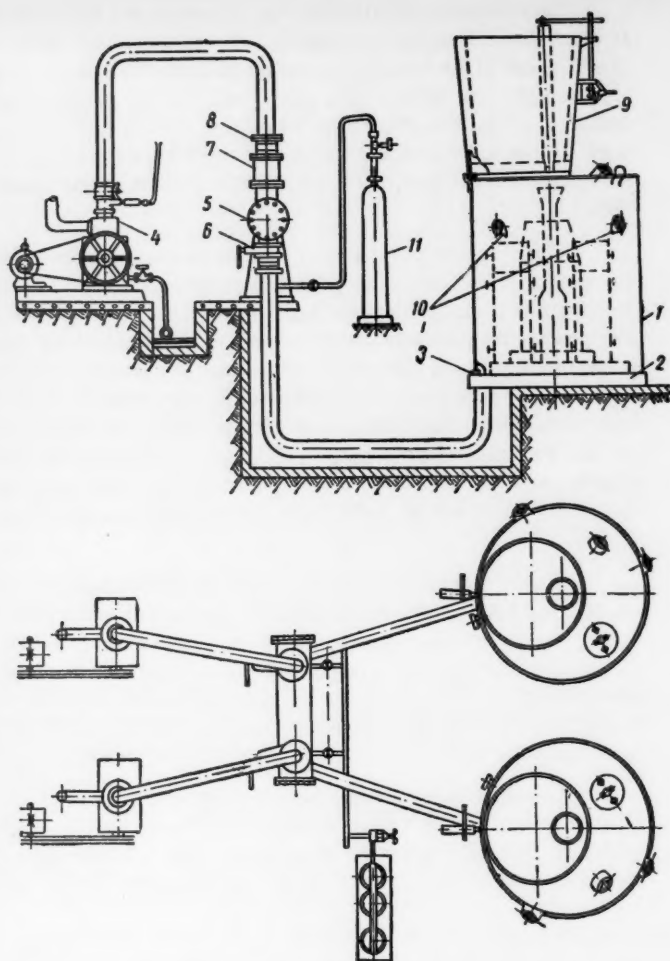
Diagram of an installation for casting steel and alloys in vacuum and in inert-gas atmosphere. 1) Hood; 2) support plate; 3) rubber gasket; 4) vacuum pump; 5) filter-collector; 6) slide valve; 7) filters; 8) flexible bellows; 9) steel pouring ladle; 10) observation windows; 11) inert-gas cylinders.
